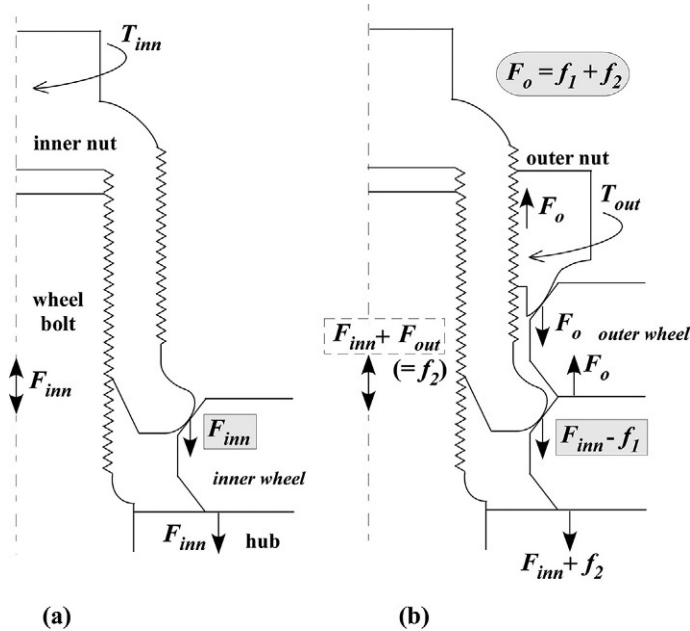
Equilibrium of forces acting on wheel bolt in two-stage tightening operation of rear wheel. (A) Inner nut tightening and (B) outer nut tightening.
